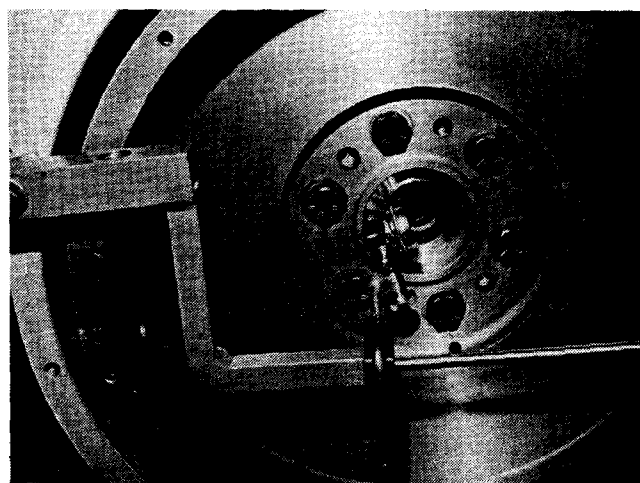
, (N114138). Indicating flywheel bearing bore
